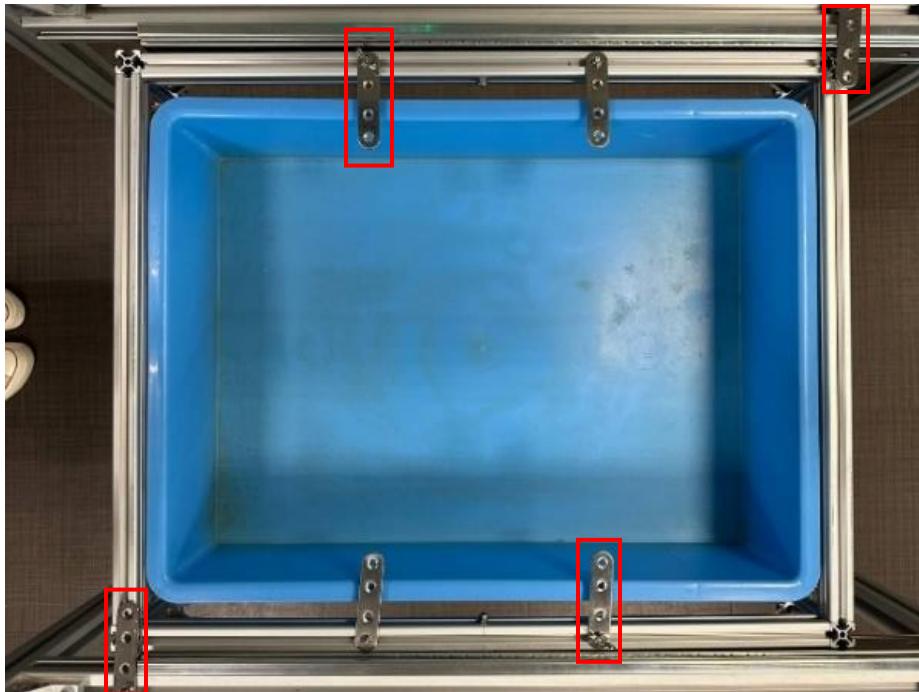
Top view of container locked in cage and cage locked on drawer slide (Iteration 1).
